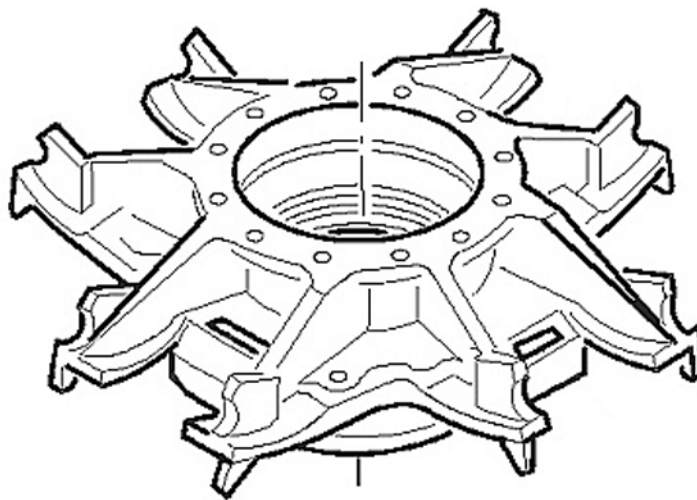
Main Rotor Head Assembly (AH-64A/D)
